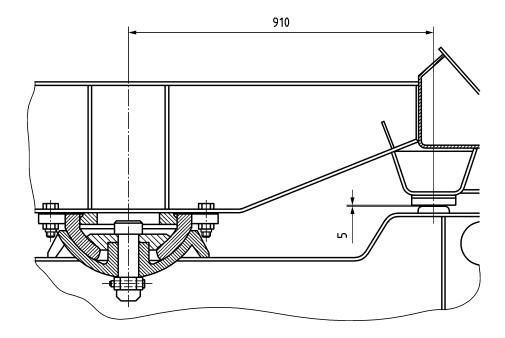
Unsprung side bearer for 3-axle steering axle bogie
